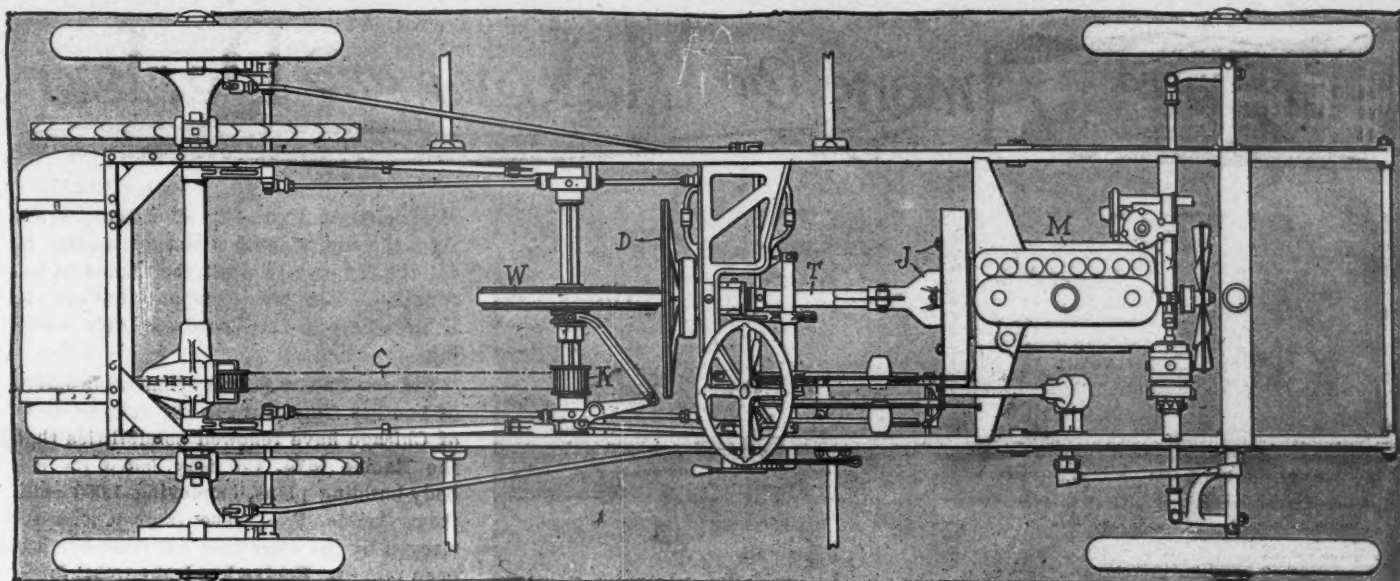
PLAN VIEW OF LAMBERT CHASSIS WITH GENERAL ARRANGEMENT OF THE FEATURES AND CONTROL MECHANISMS
